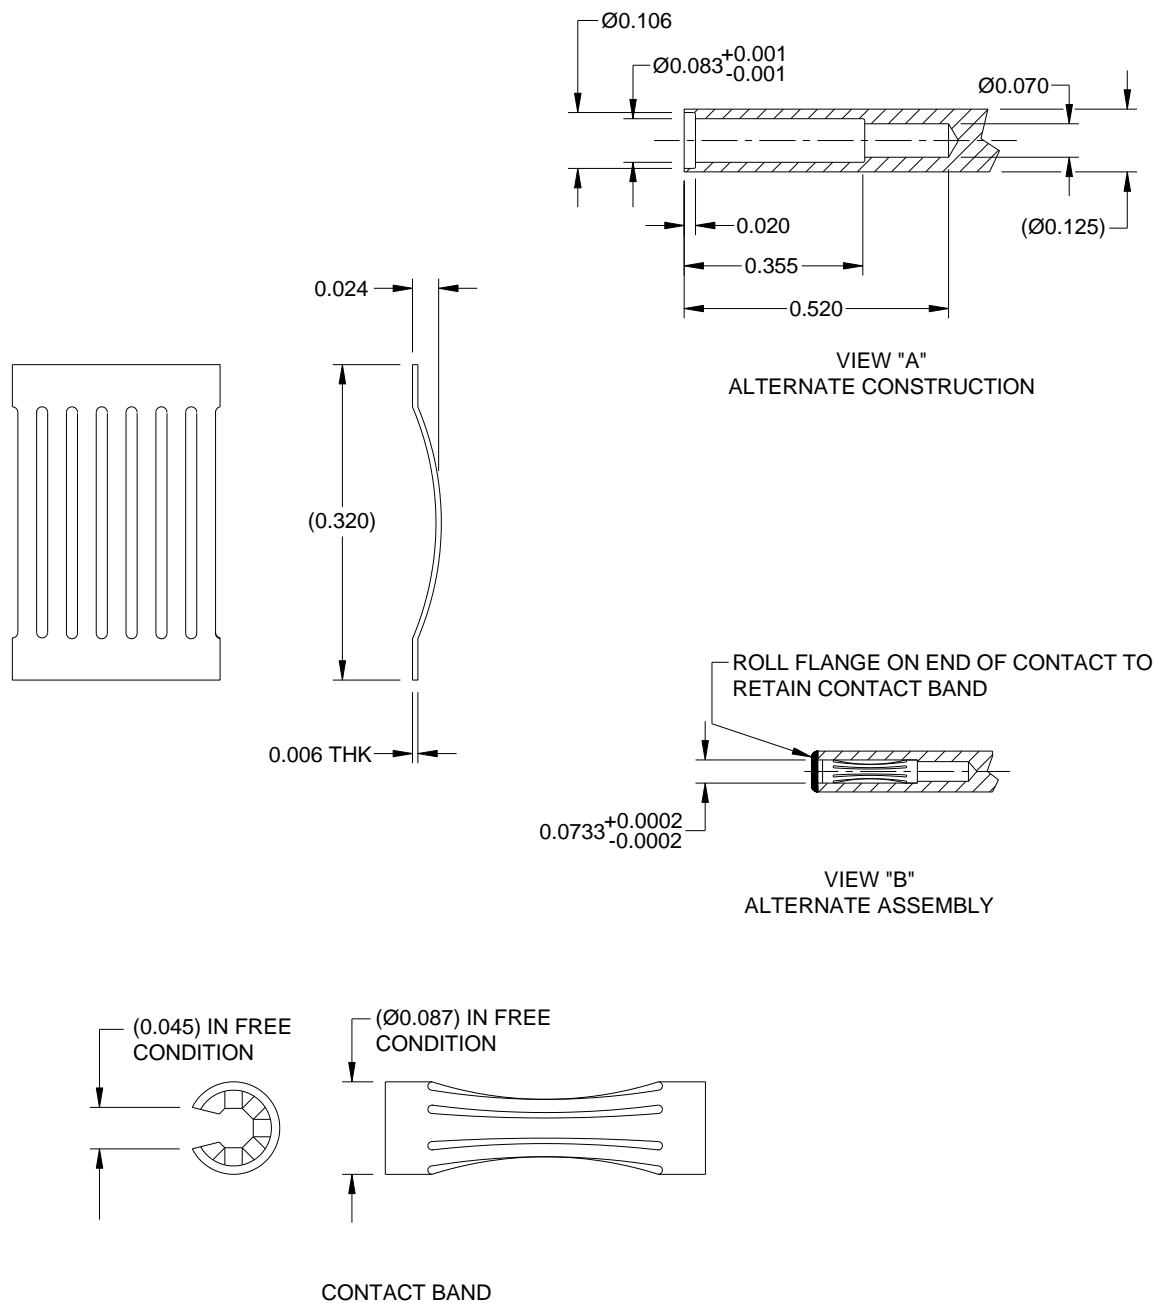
Socket contact assembly – M24231/30-030 - Continued.
